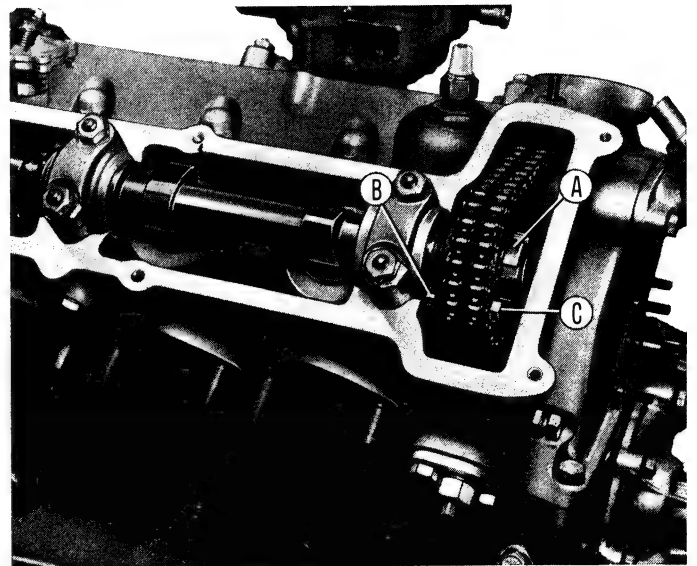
Detail of camshaft drive sprocket mounting on engine 118 B.000.
